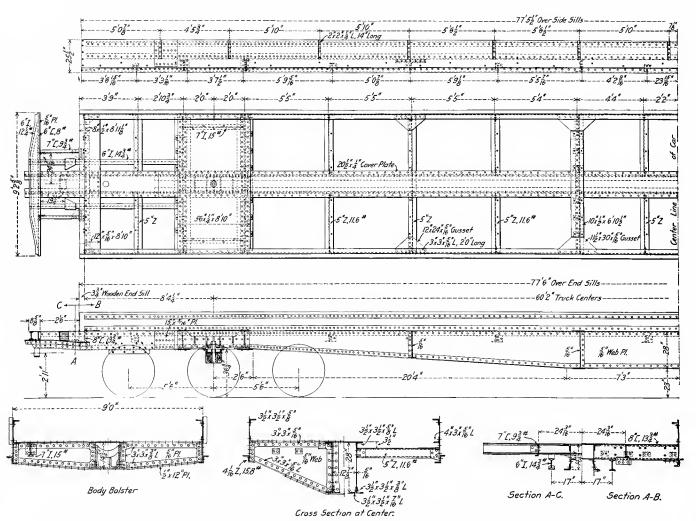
Steel Underframe for Chicago, Burlington & Quincy Parlor Car. Builder, The Barney & Smith Car Company.
